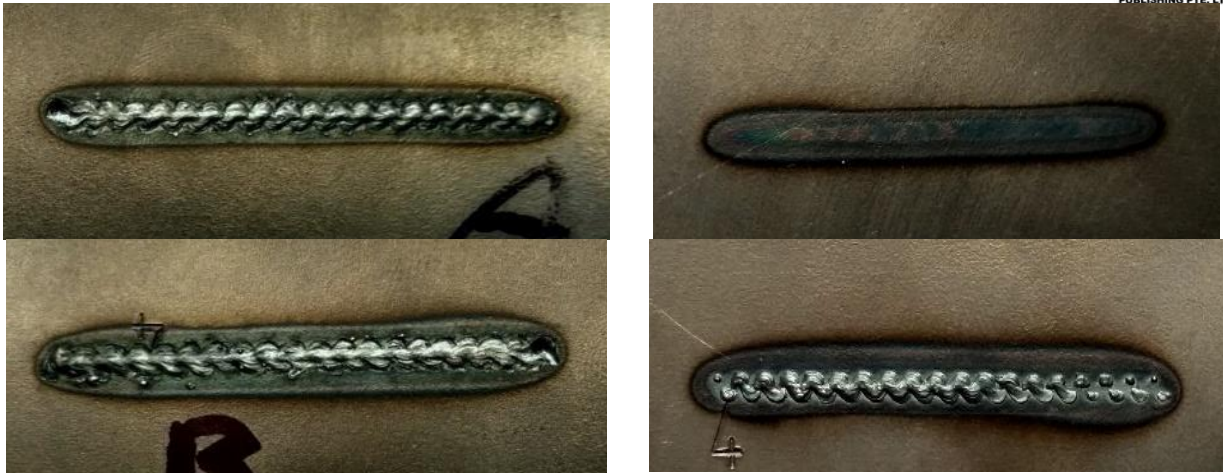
The view from the weld face and root side, order as per Table 2
